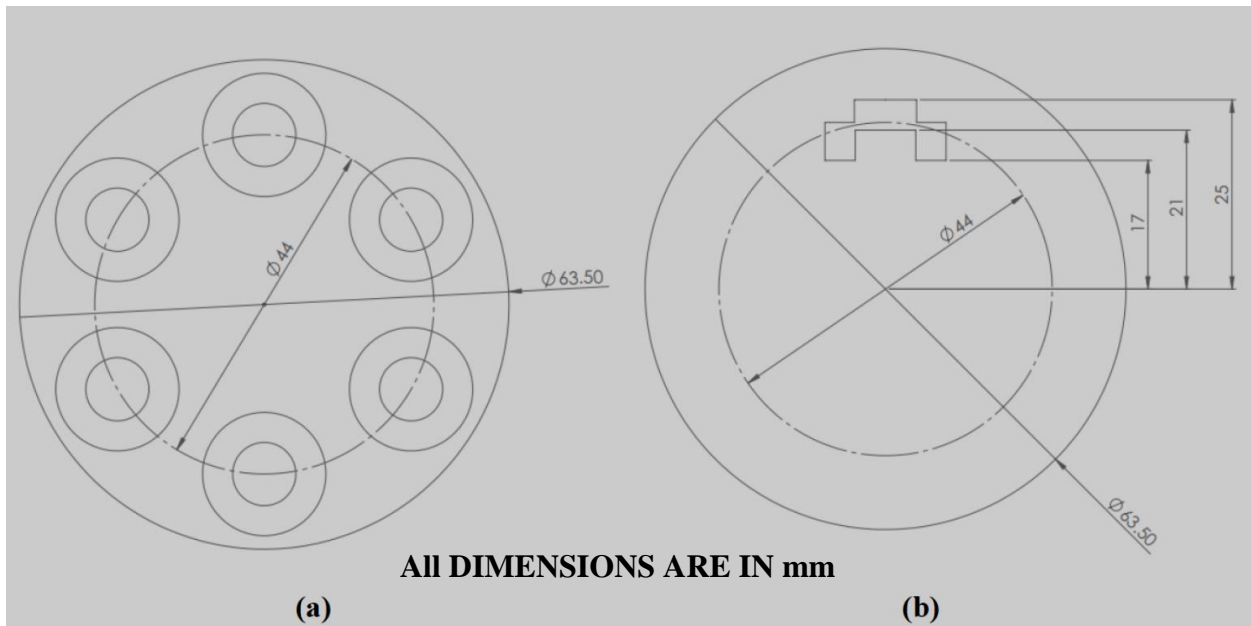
Extraction location for shear hat sample (a) Extruded (b) Transverse Direction [24].
